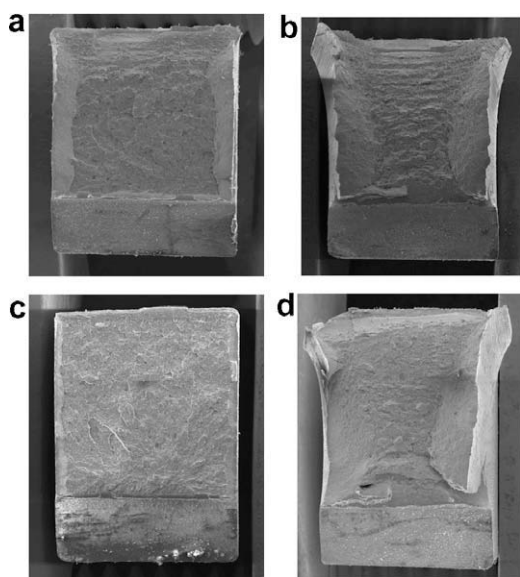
(a) Fracture of lower shelf impact of Eurofer (anneal 980 °C) tested after 30 dpa, (b) Fracture of upper shelf impact of Eurofer (anneal 980 °C) tested after 30 dpa, (c) Fracture of lower shelf impact of Eurofer-2 (anneal 1040 °C) tested after 30 dpa, (d) Fracture of upper shelf impact of Eurofer-2 (anneal 1040 °C) tested after 30 dpa.
